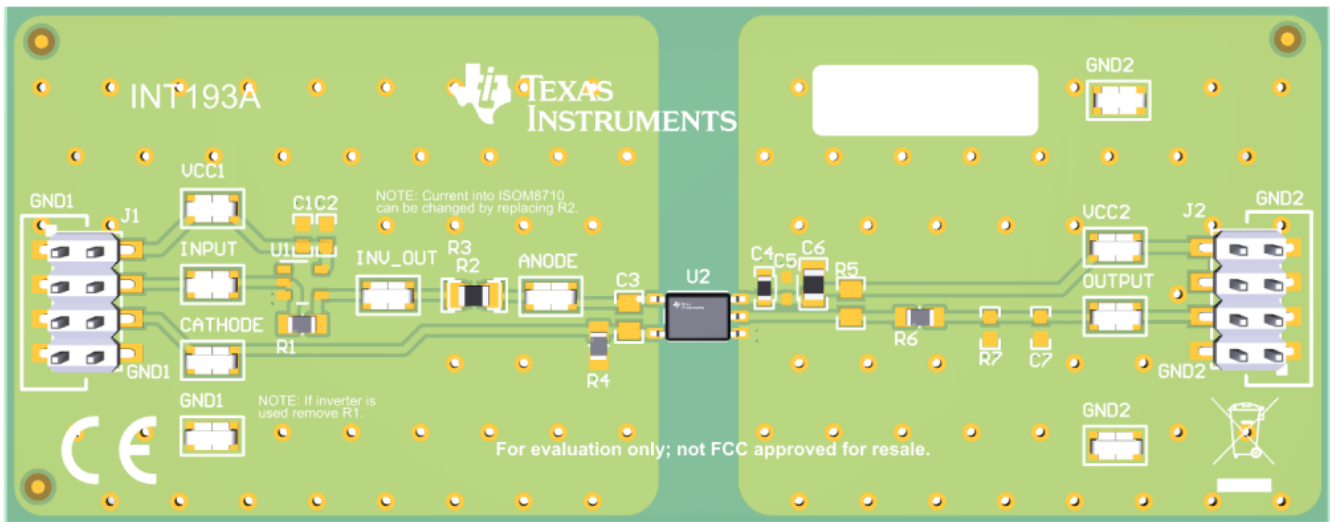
ISOM8710DFEVM PCB 3D Diagram
